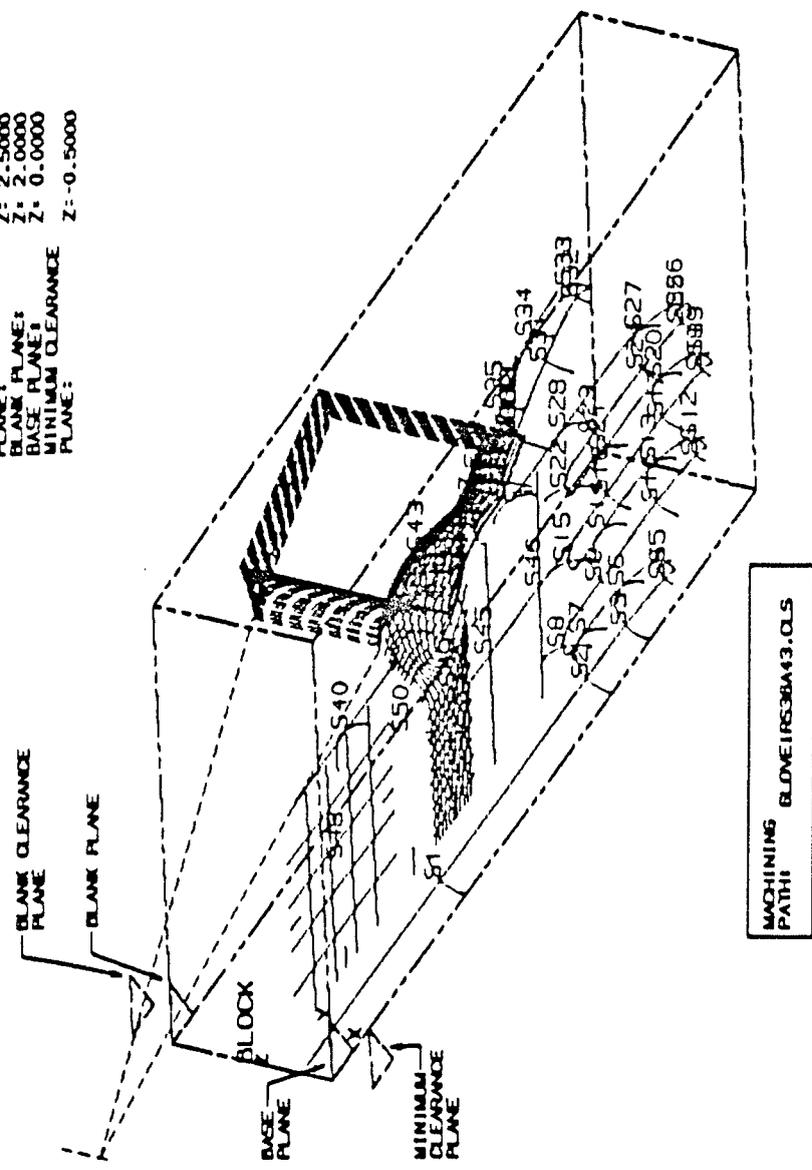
Machining Path: GLOVE1RS36A43.CLS
